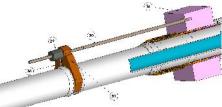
Schematic representation of the clamping and fastening pieces mounting for the rod positioning
